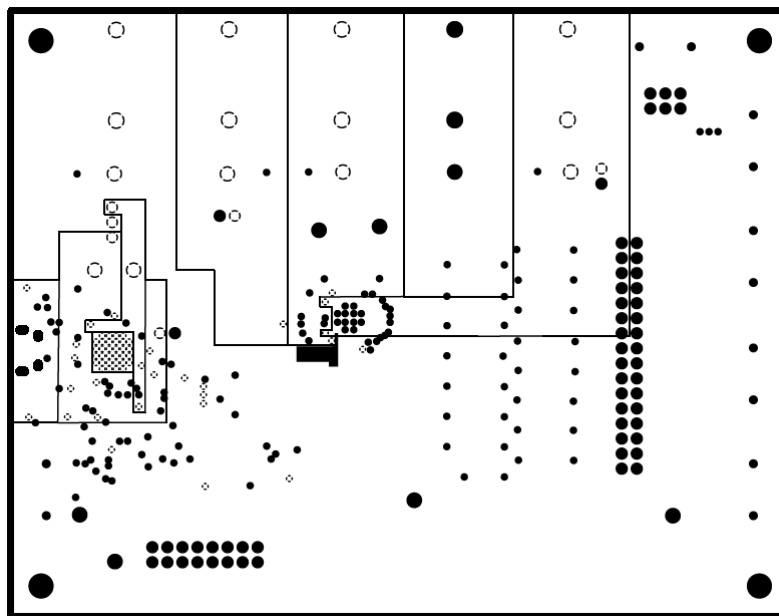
DAC81416-08EVM PCB Power Layer Layout
